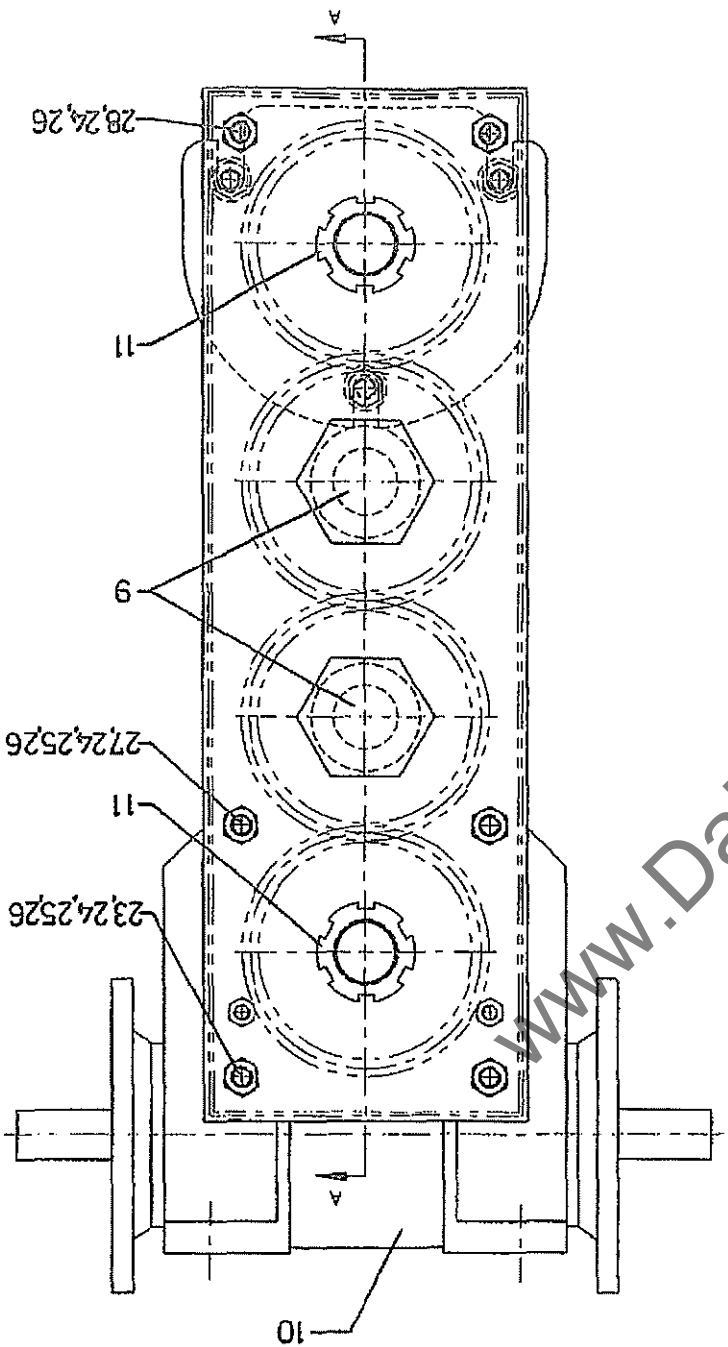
GEAR DRIVE TO BOTTOM FEEDROLLS
